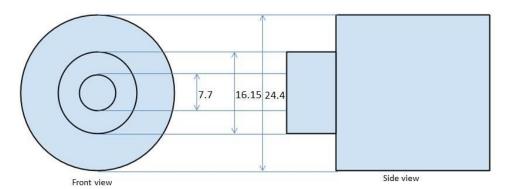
Coarse Adjustment Knob Shaft Coupler Dimensions
